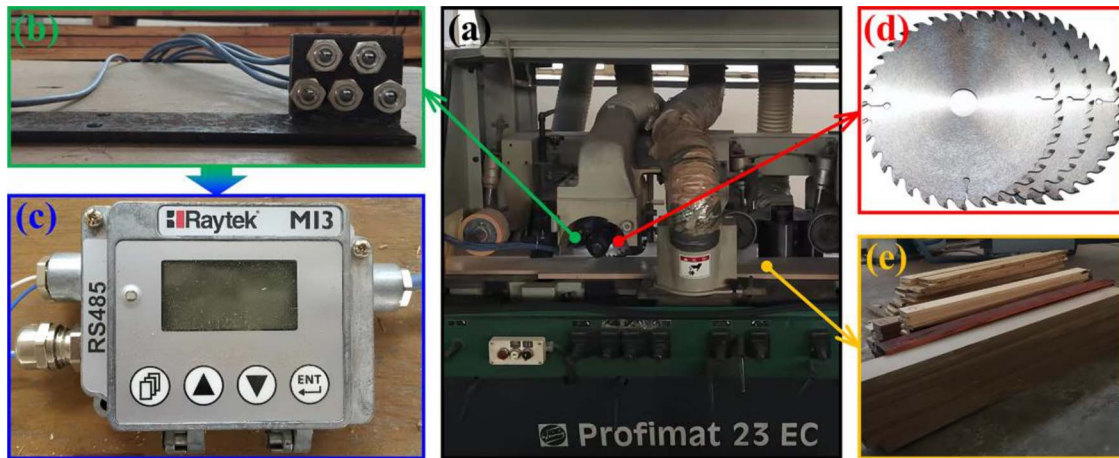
Experimental system for the measurement of the saw blade temperature: (a) sawing system; (b) infrared thermometer probes; (c) infrared thermometer control box; (d) saw blade; and (e) experimental material.
